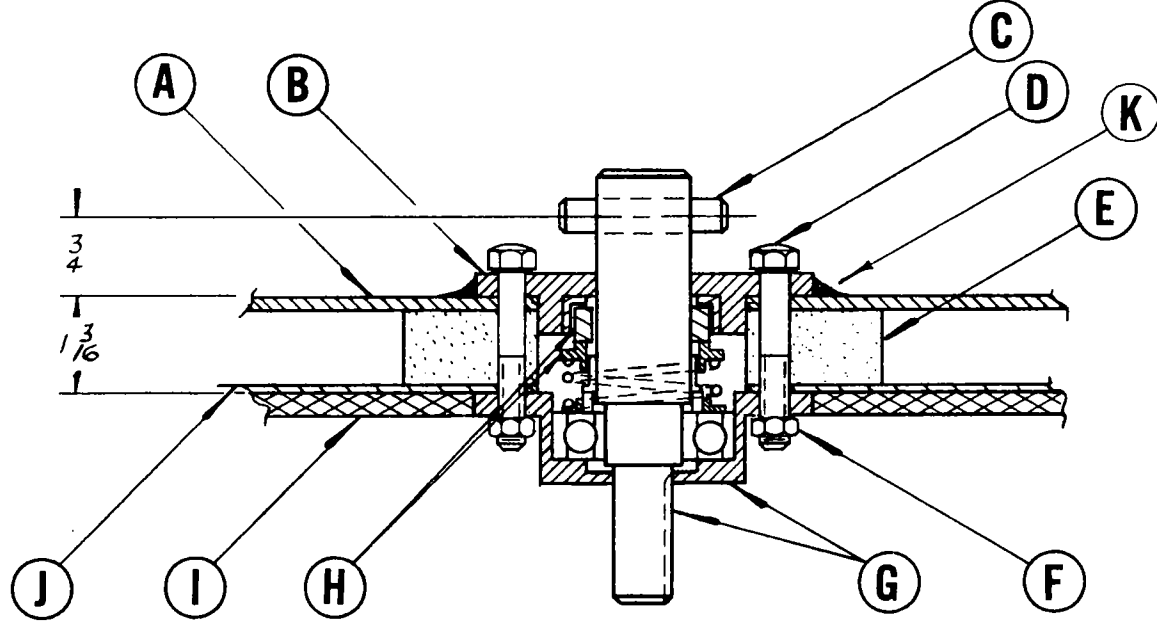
LOWER BEARING & SEAL ASSEMBLY.
